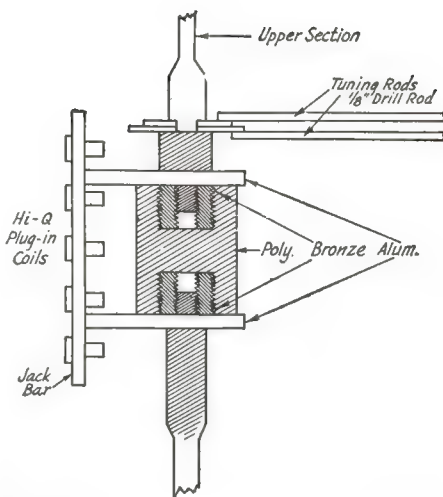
Construction details of the mounting for the rods and plug-in coil.
